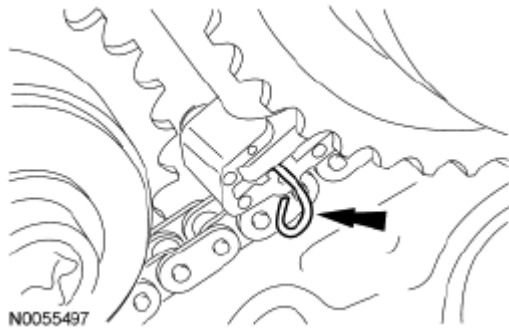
Locating RH Secondary Timing Chain Tensioner Lockpin
